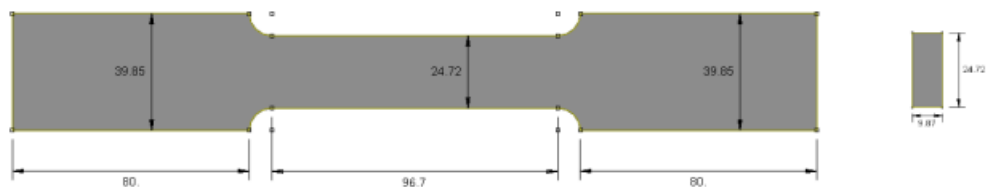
Dimensions of HSS material tensile test specimen (DISSIPABLE, 2021).
